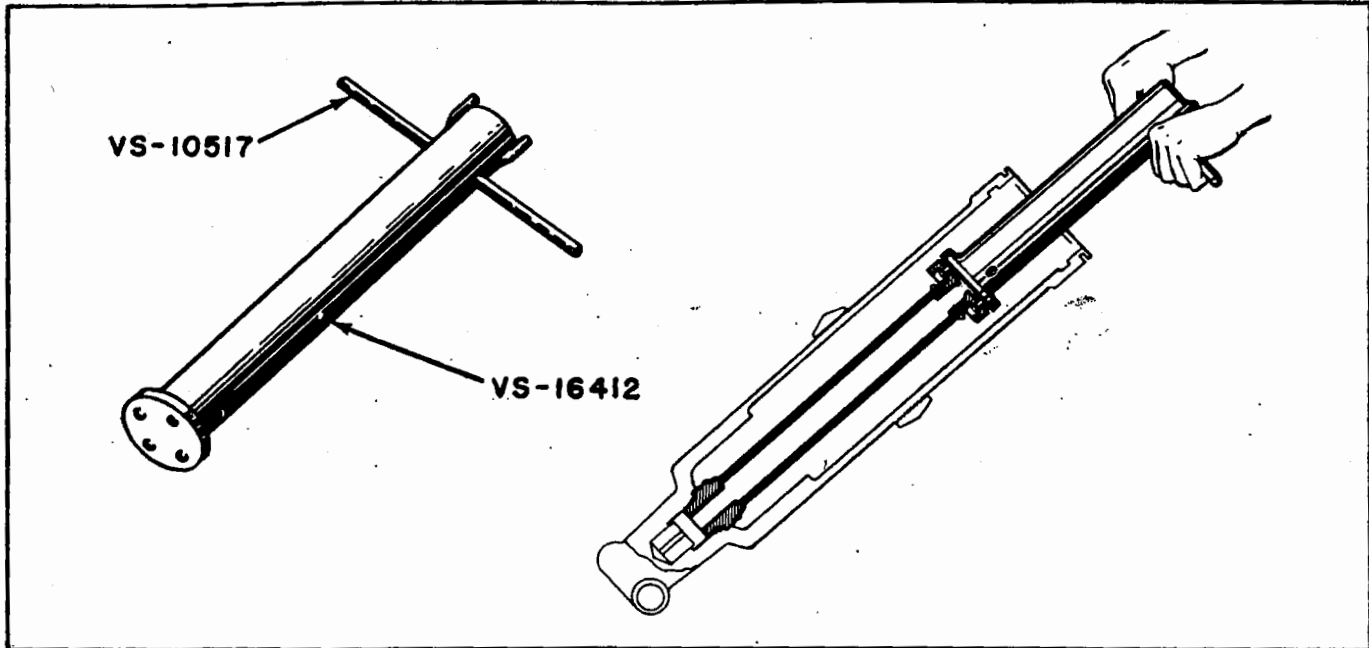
Wrench - Used for Removal of Flapper Valve Assembly from Main L.G. Shock Strut.
